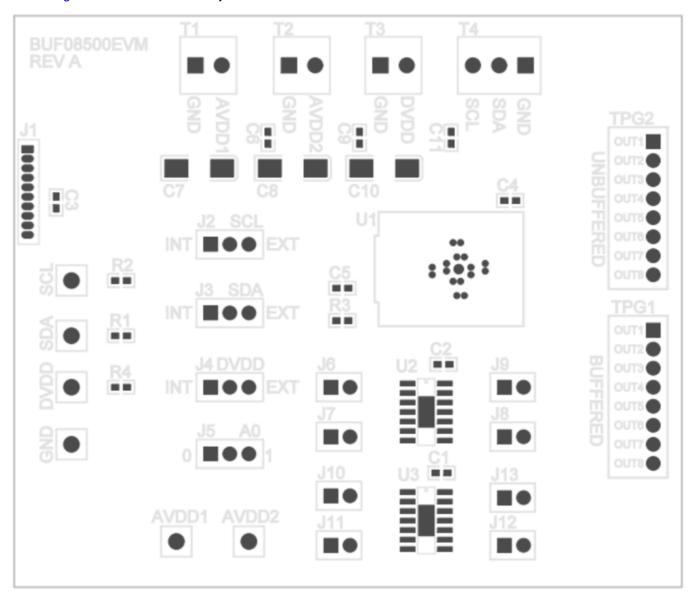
BUF08500EVM PCB Top Layer (Component Side)
